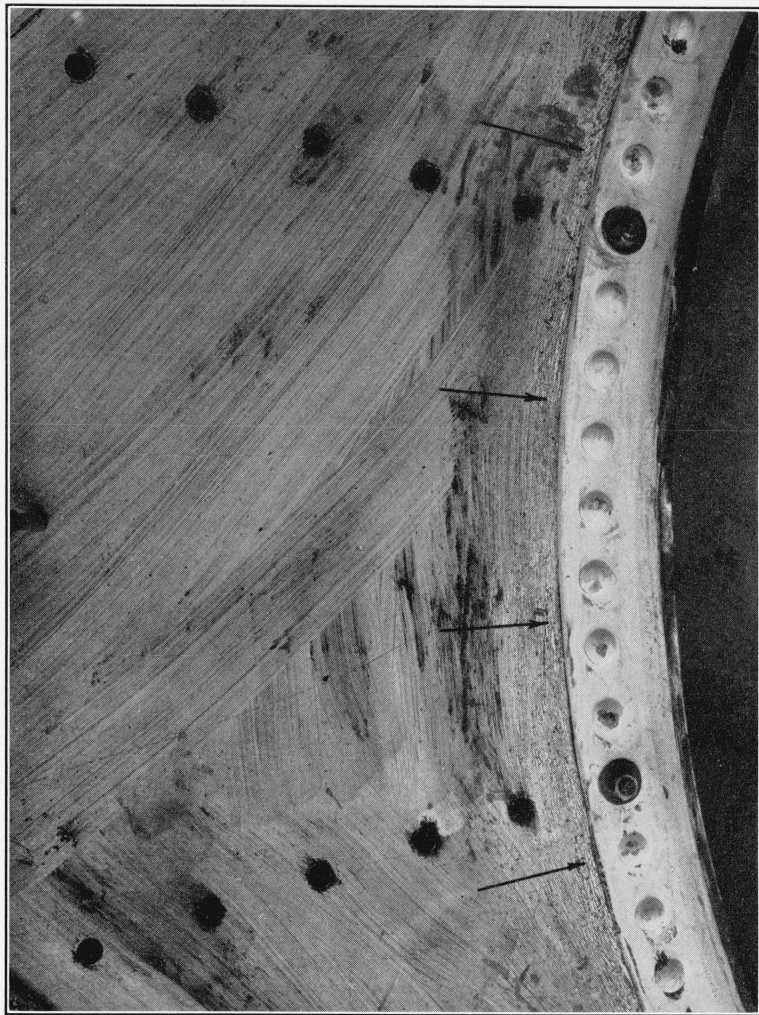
Inner portion of the rigid-frame specimen after failure.
